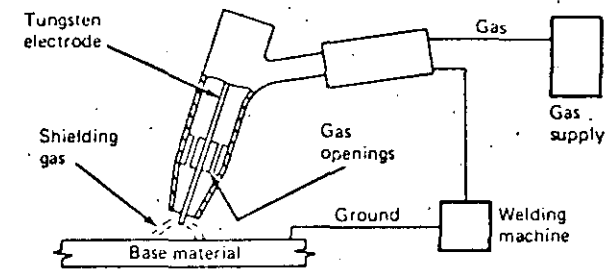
Gas tungsten-arc welding.
